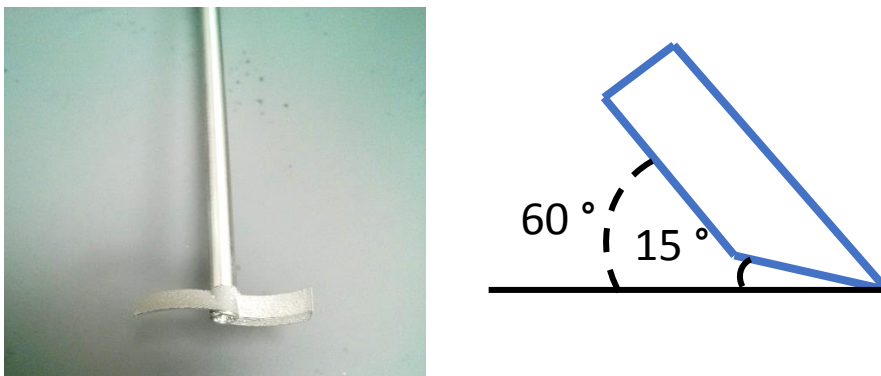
Scaled down conventional AFBD impeller blade (laser sintered)
